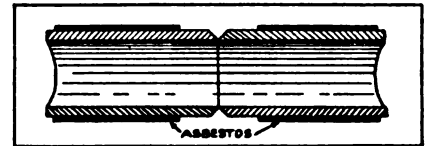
SECTIONAL VIEW OF ENDS READY TO WELD TOGETHER WITH ASBESTOS STRIPS IN PLACE
